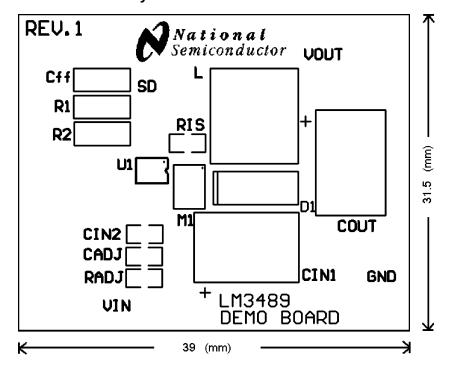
LM3489 Demonstration Board PCB Top Overlay
